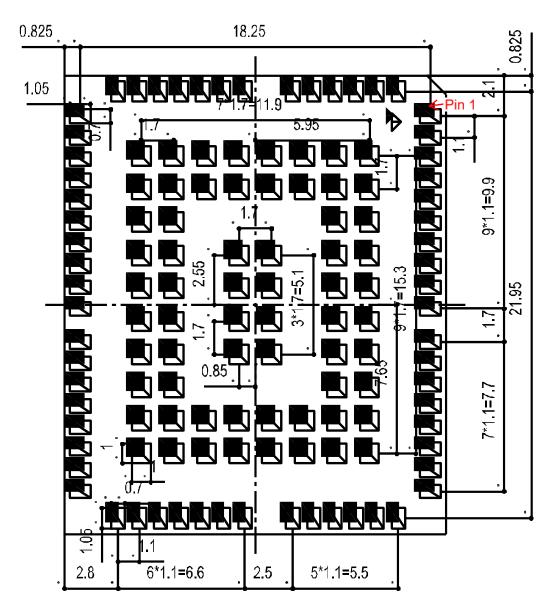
EG915Q-NA Bottom Dimensions (Bottom View, Unit: mm)
